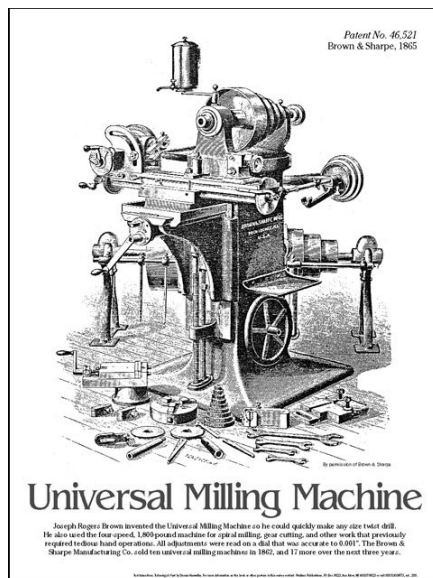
Brown & Sharpe, universal milling machine, 1865.
